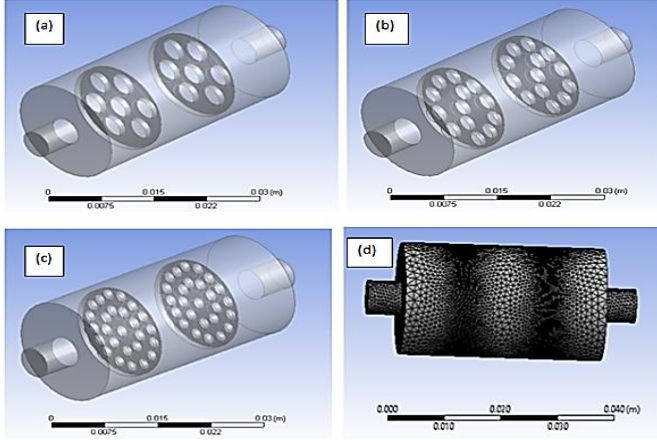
Isometric projection of muffler (a) sample A (7 holes), (b) sample B (13 holes), (c) sample C (26 holes), and (d) typical modeled sample.
